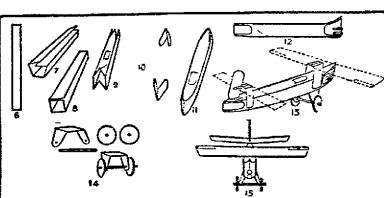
is the cardboard when folded. Figure 7 is the cardboard ready for pasting. Figure 8. after pasting. Figure 9, the ends and cockpit. Figure 10, paper for the ends. Figures 11 and 12, the fuselage. Figure 13, the supports and rudder in position. Figure 14, the chassis with match for axle. Figure 15 shows the glider, with paper fasteners as weights.
